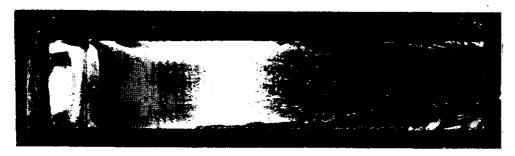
Fracture fractography of the specimen with double-grooves.
